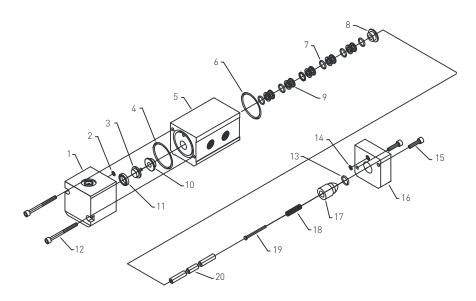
Exploded assembly of 3/2 and 5/2 way 1.1 C_v Falcon II
